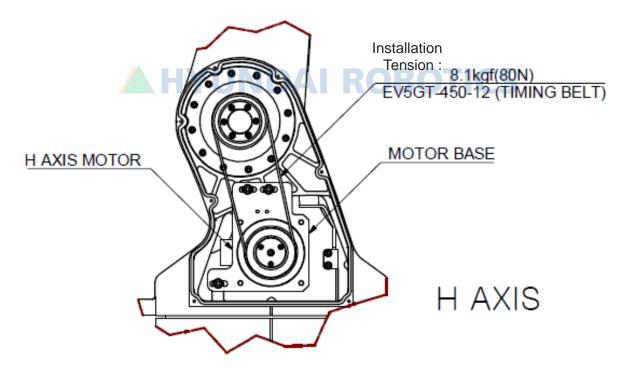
Location to check the tension of H axis timing belt [HH007C]
